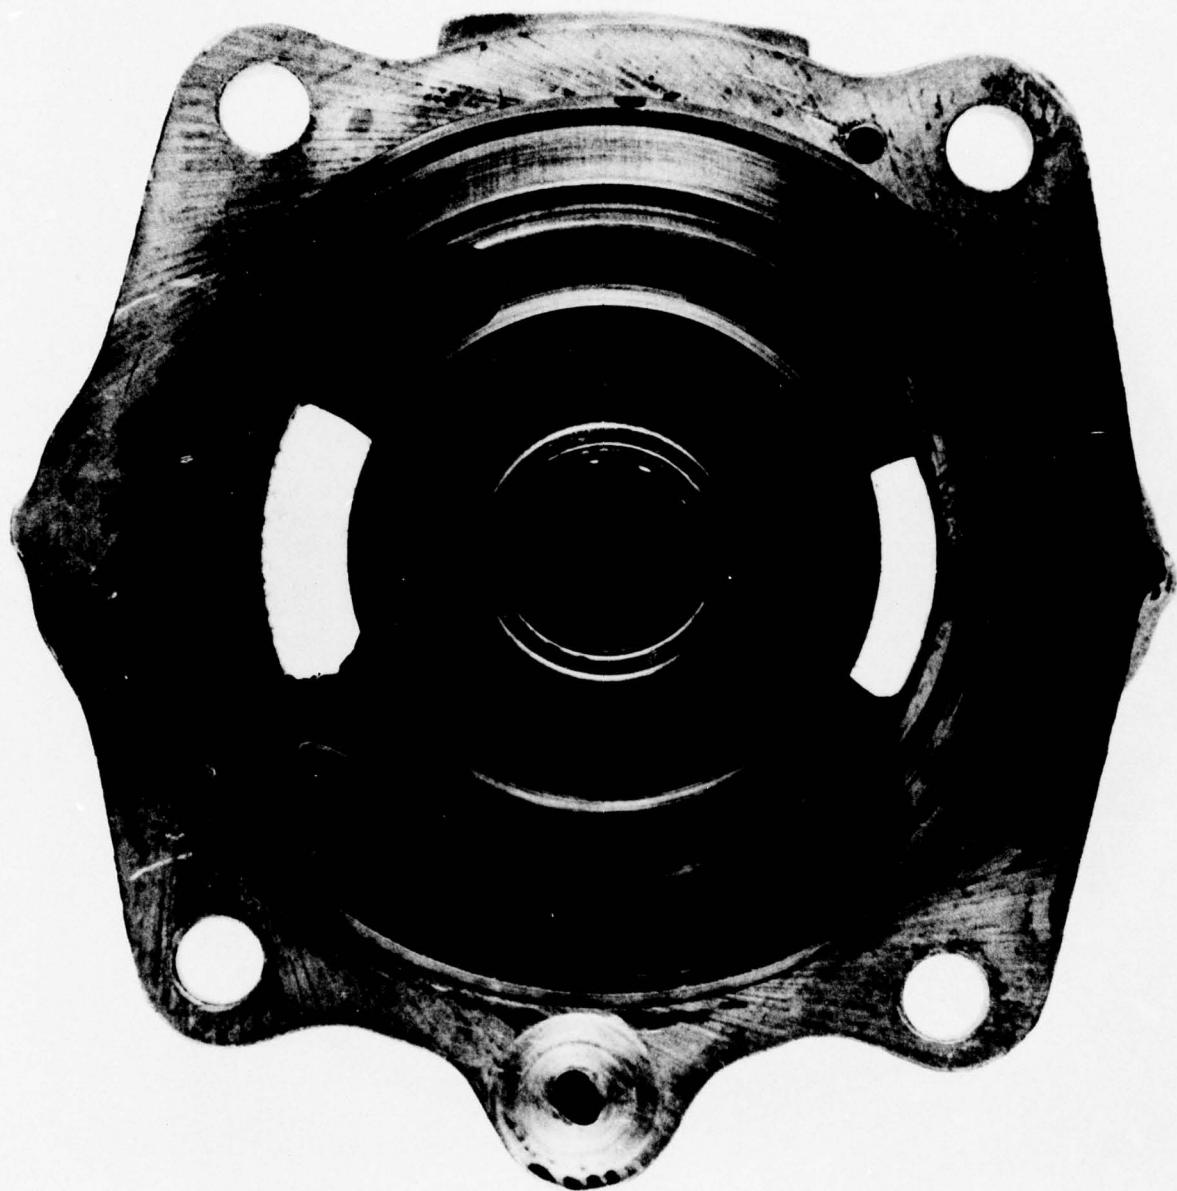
Pump Valve Plate with Needle Bearing Before Test
